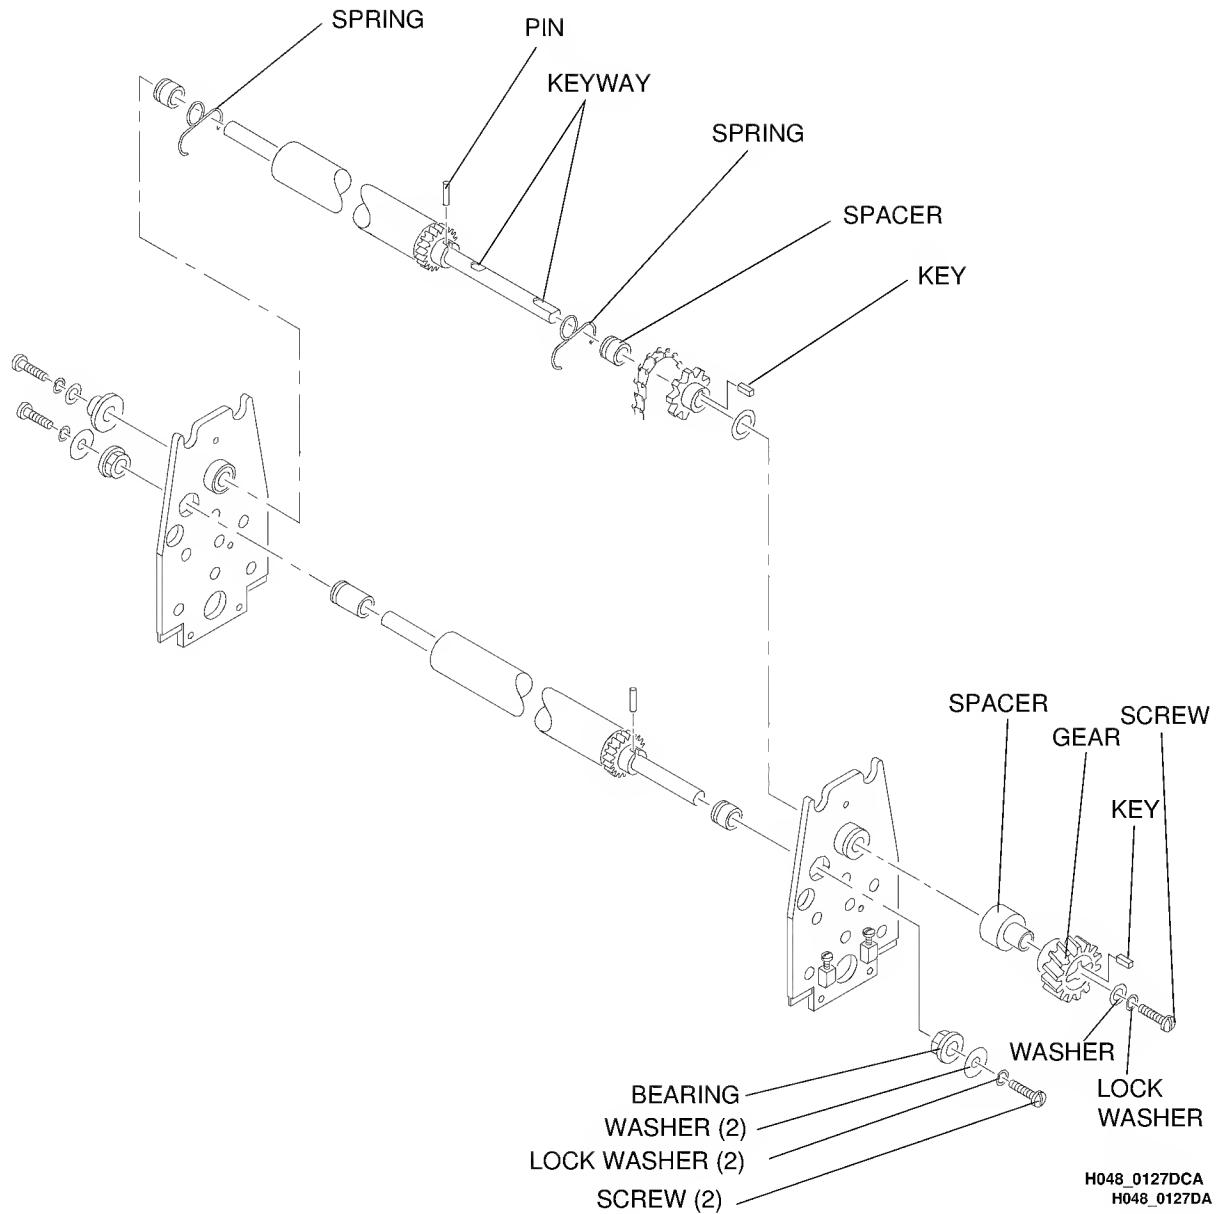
Disassembling the Resilient Pressure Drive Roller from the Wash Rack
